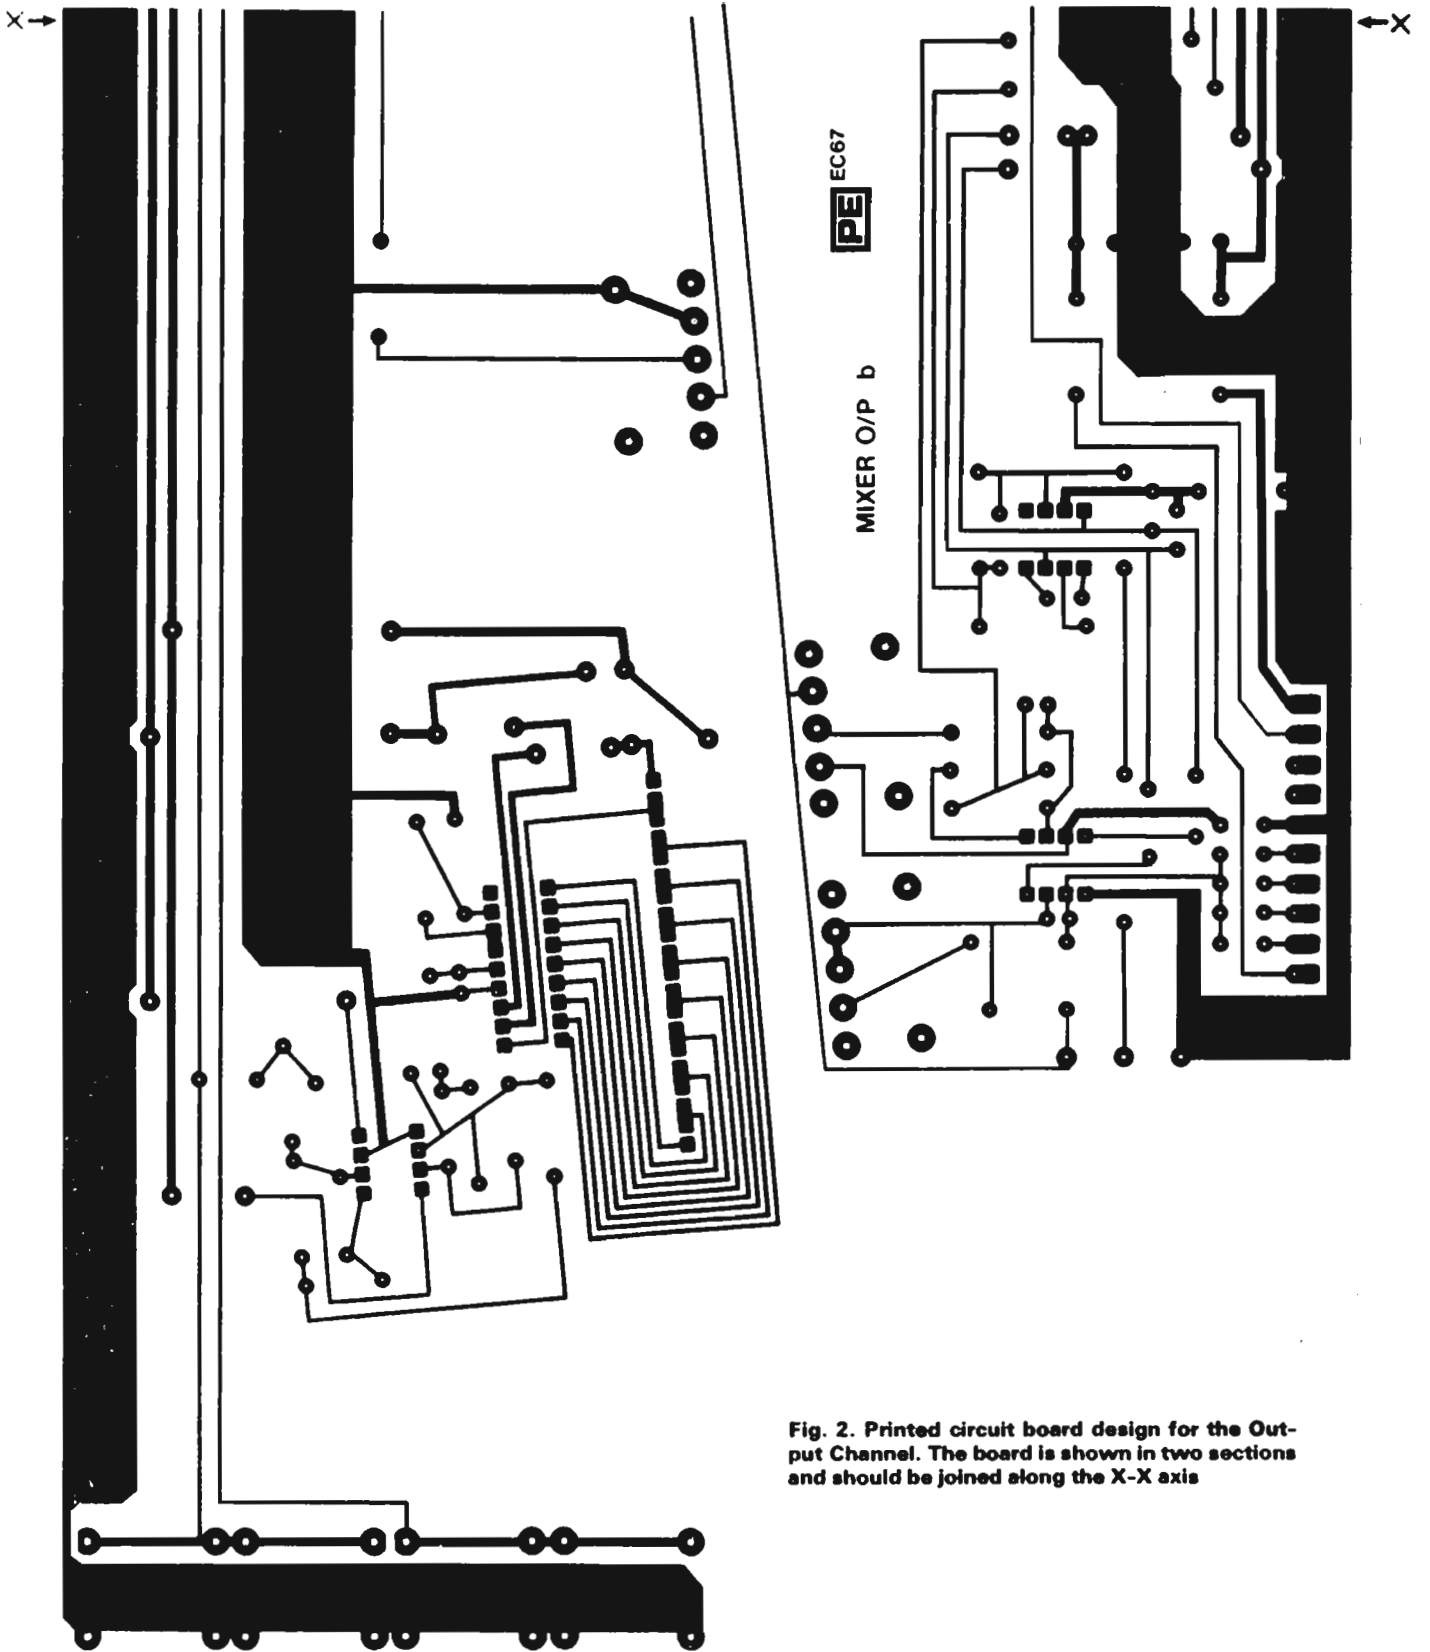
Printed circuit board design for the Output Channel. The board is shown in two sections and should be joined along the X-X axis
